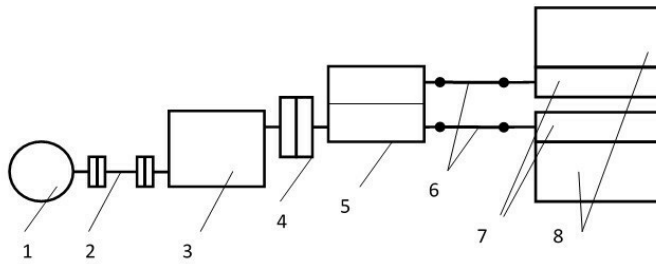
A typical drivetrain of the rolling mill: 1 – DC electric motor; 2 – shaft; 3 – gearbox; 4 – gear coupling; 5 – pinion stand; 6 – slipper pads spindles; 7 – work rolls; 8 – backup rolls
